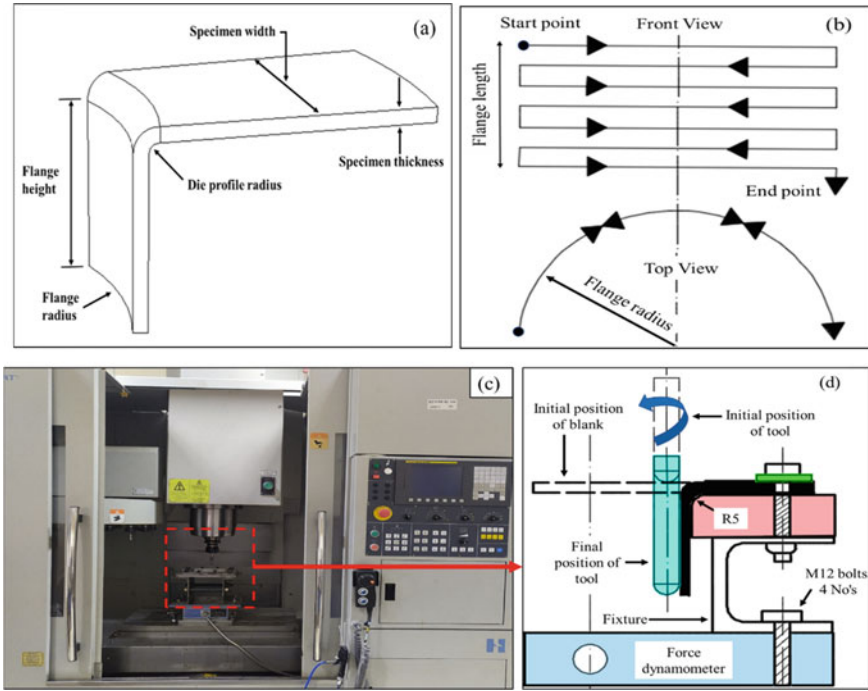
a Nomenclature, b tool path generated of stretch-flanged specimen, c experimental CNC machining center, d schematic representation of the incremental sheet flanging process
